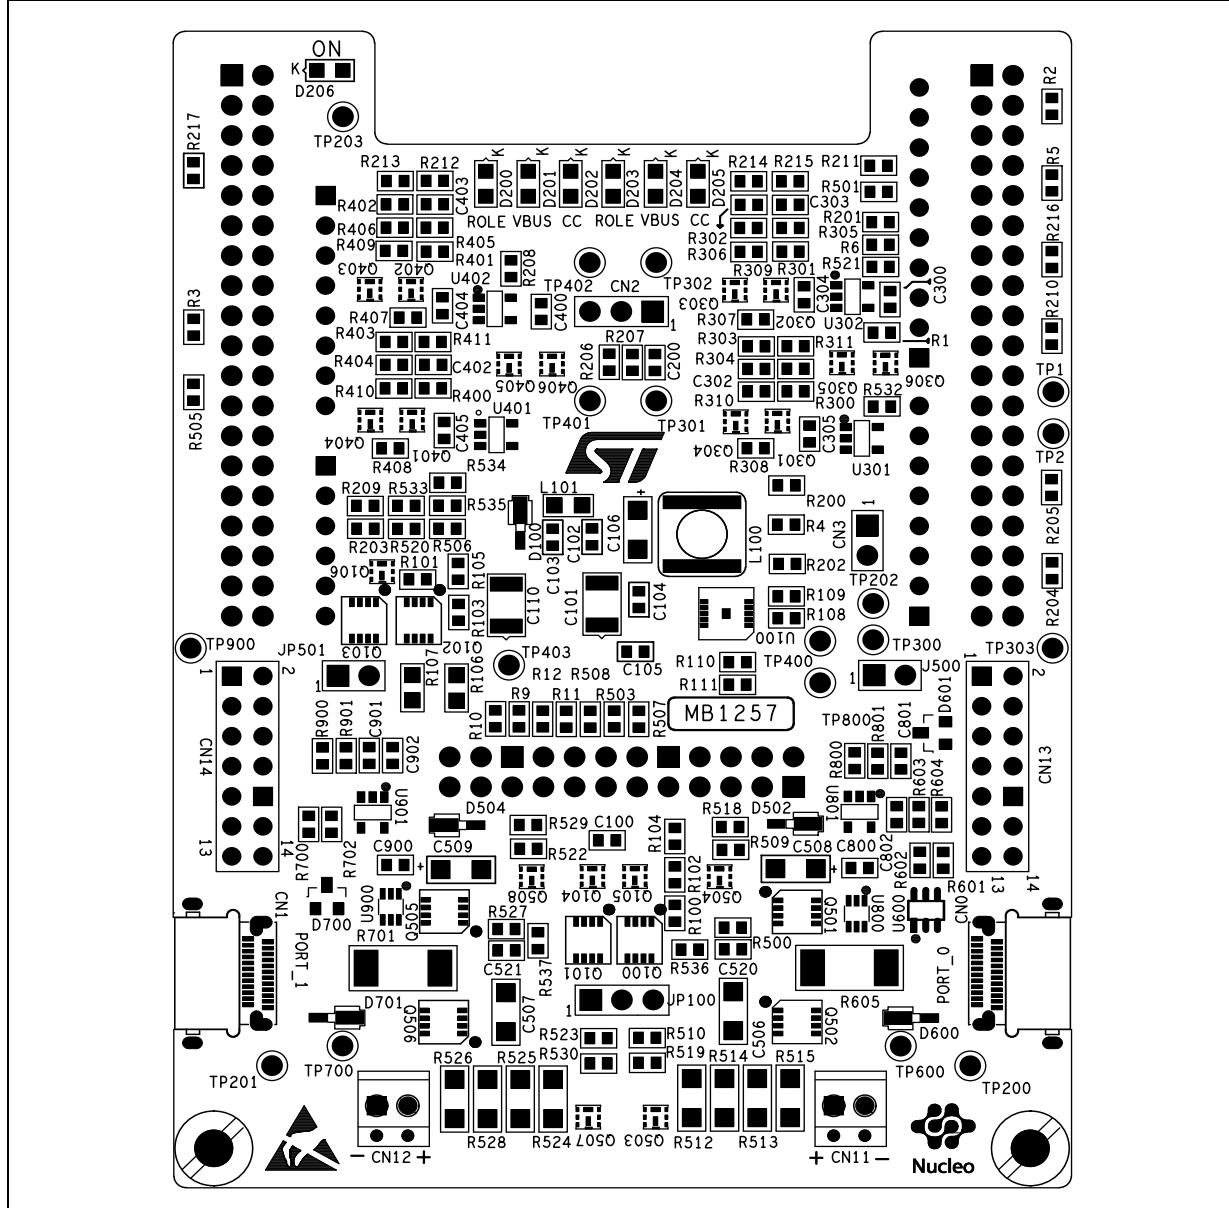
MB1257C expansion board, silkscreen layout (top view)
